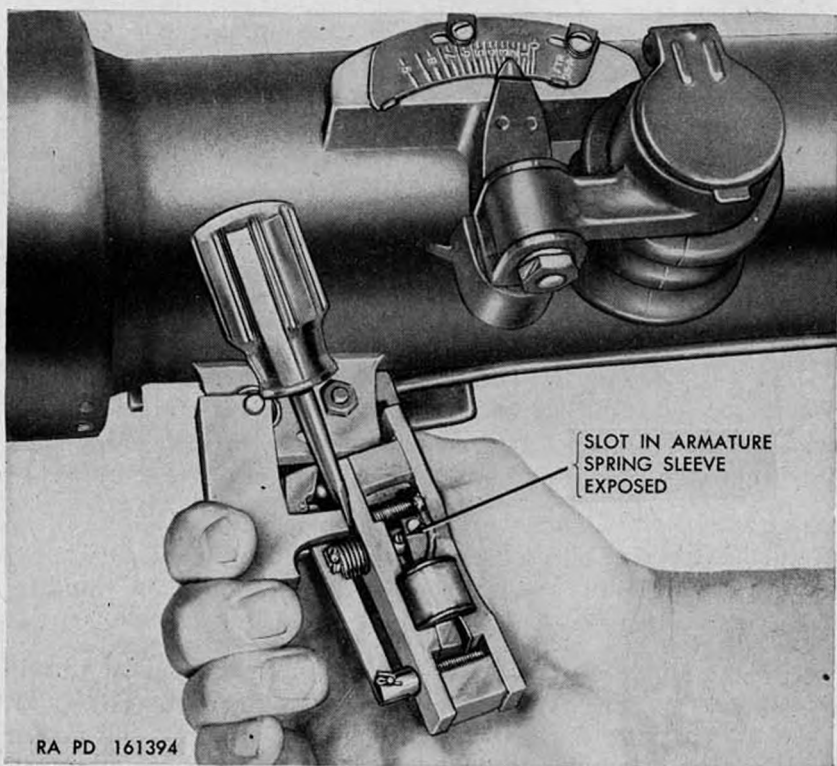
Lubrication of armature spring in electrical firing mechanism 7140325.
